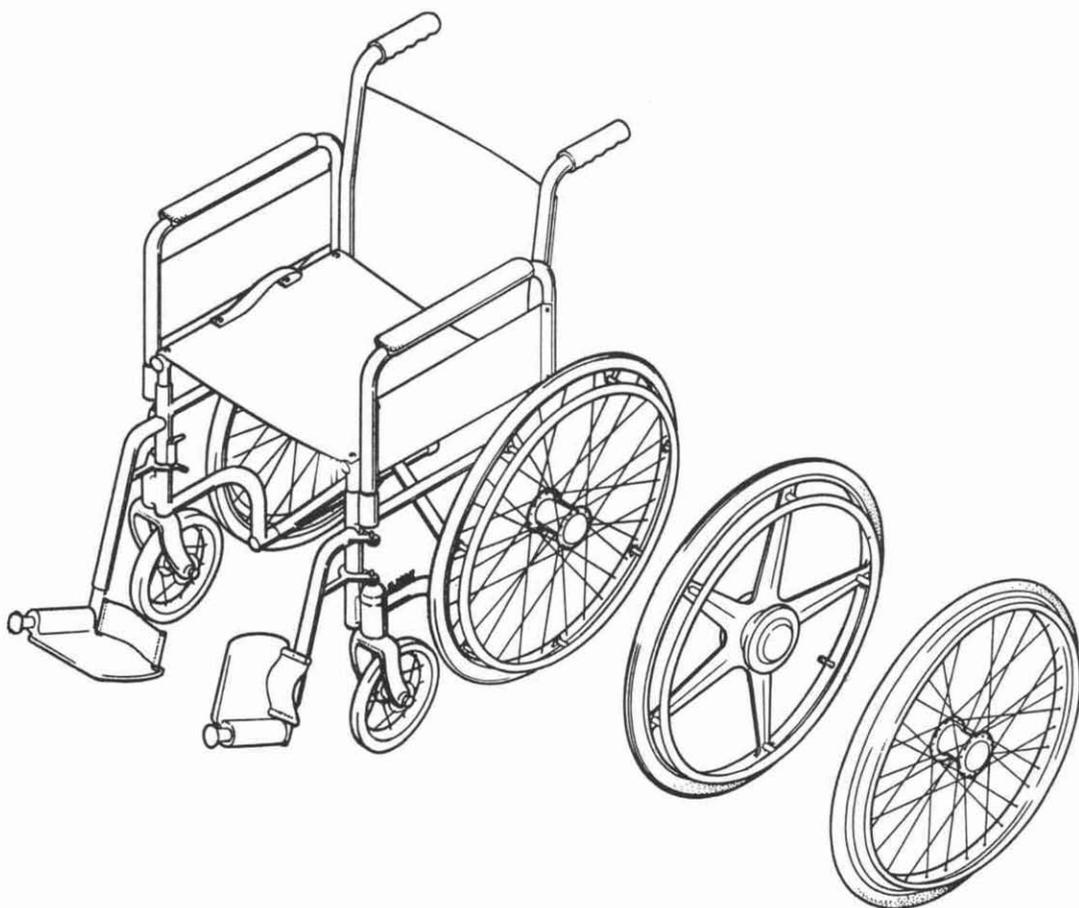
Basic wheelchair with standard 24-inch diameter wire-spoke wheel and two options: the cast magnesium wheel and a wheel with special built in hand rim.
